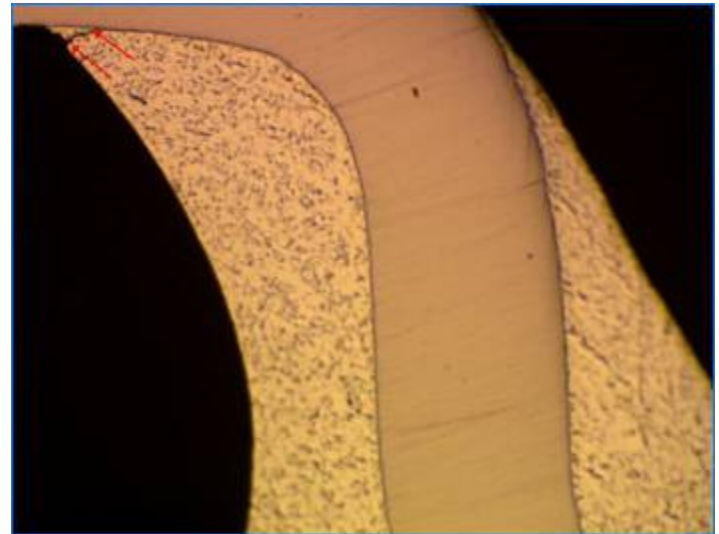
cross section, SN66, U61, right lead solder crack, 200xc
